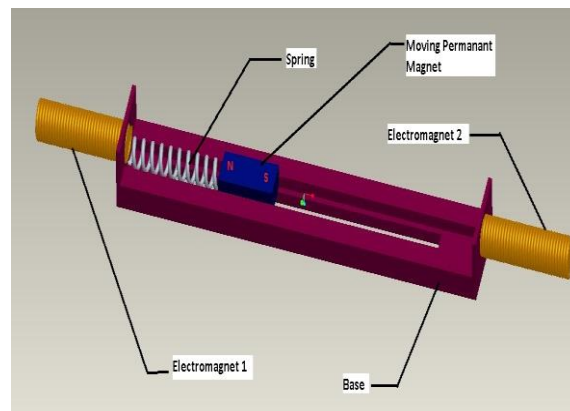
Assembly of the mechanism comprising of two fixed electromagnets and a moving permanent magnet mounted on a base with spring attached as described
